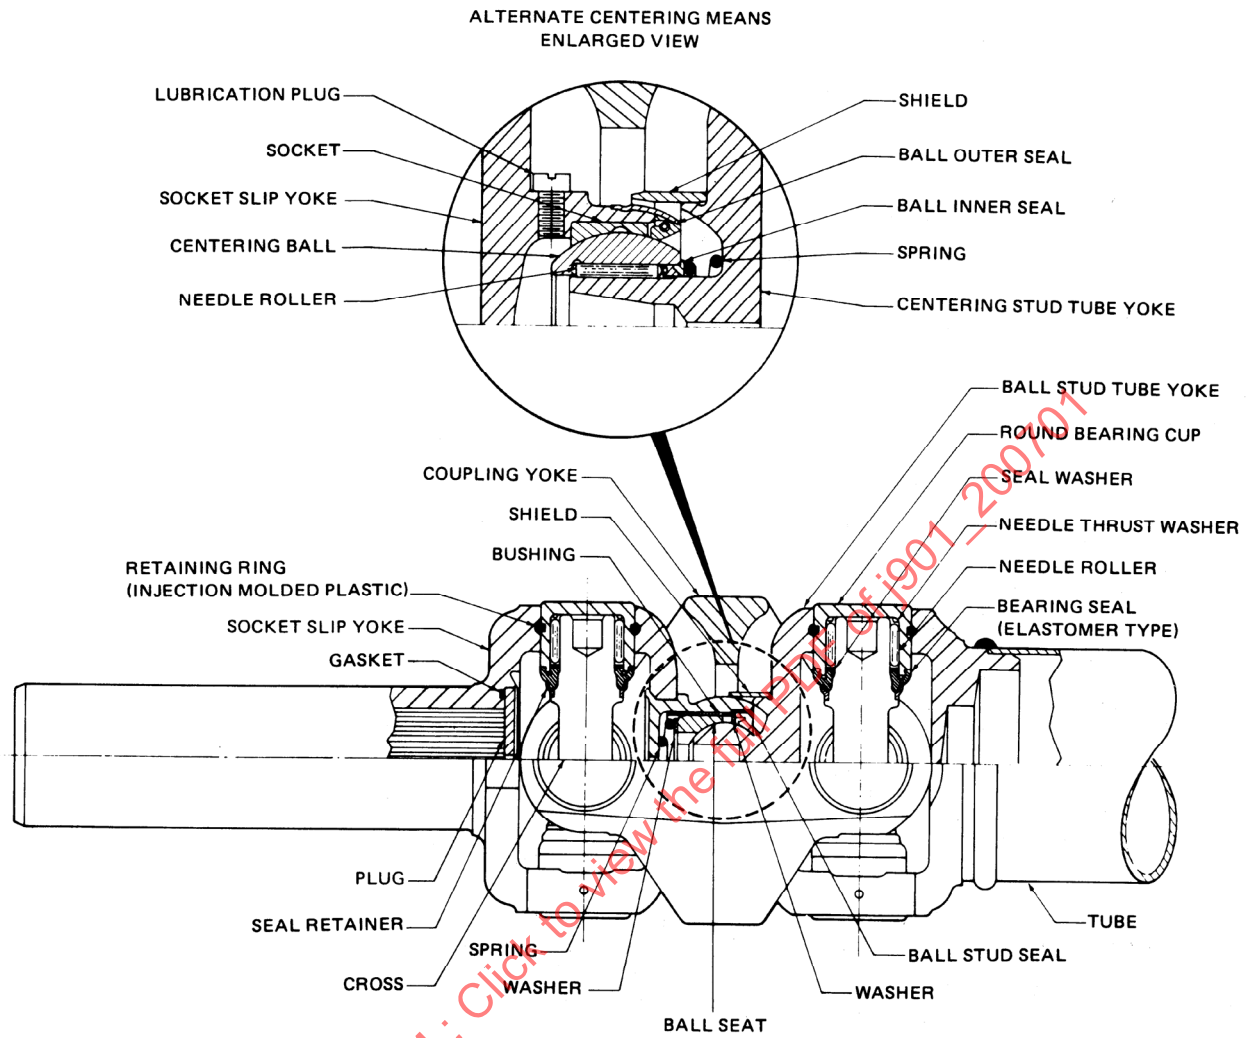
DOUBLE CARDAN UNIVERSAL JOINT
